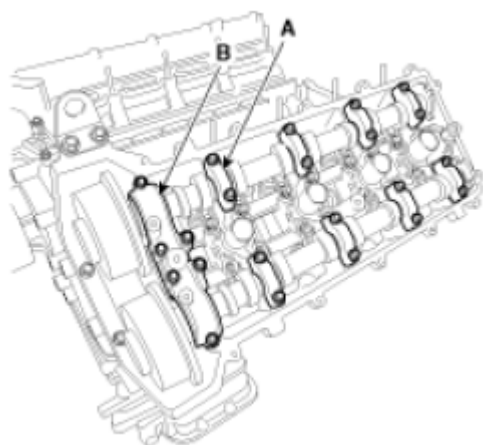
Identifying Bearing Cap And Thrust Bearing Cap
